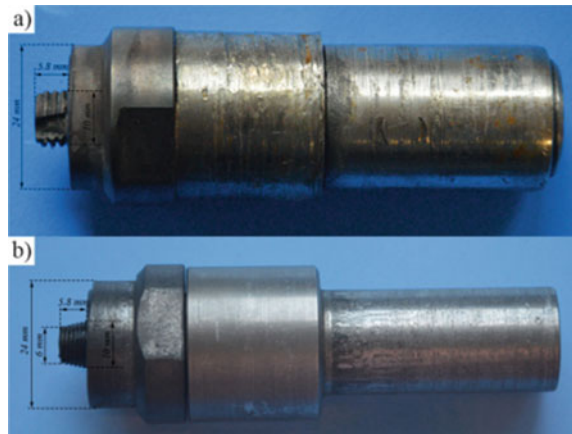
Tool pin profiles used by Elangovan et al. [15] to fabricate the joint
